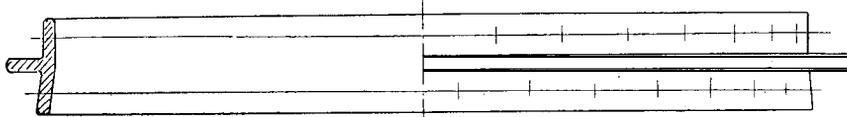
T-SECTION BOILER RING. (Full size.)
